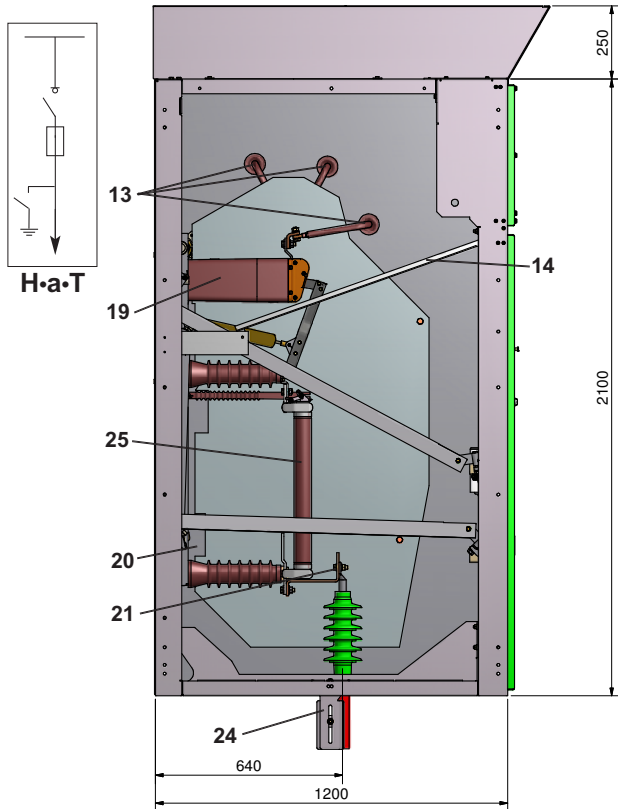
PRO-AIR H-a-T, Type transformer feeder panel
